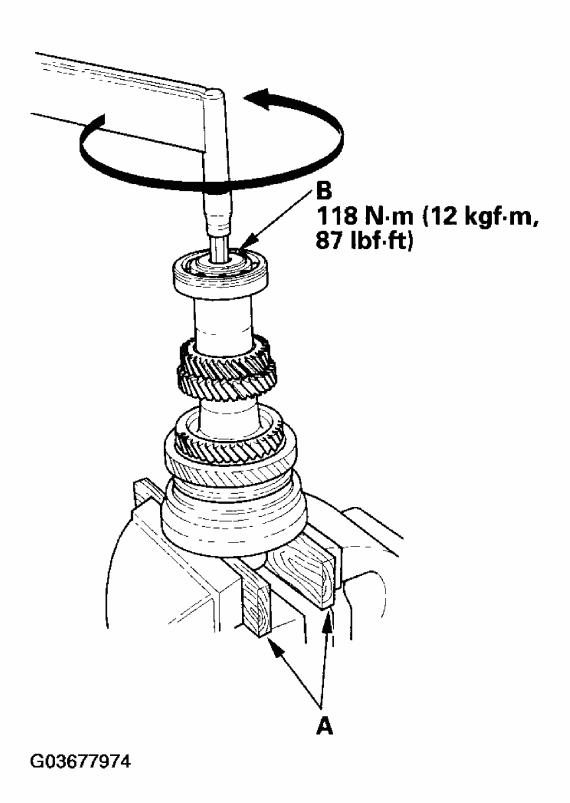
Identifying Tightening Torque Of Countershaft Assembly Bolt Courtesy of AMERICAN HONDA MOTOR CO., INC.
